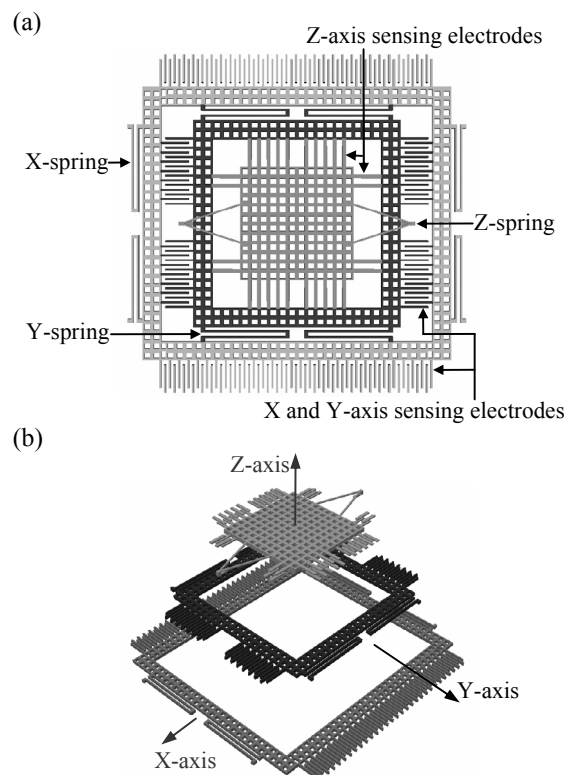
Design concept of single proof-mass tri-axis accelerometer, (a) top view, (b) exploded drawing of the sensing units for three different axes.
